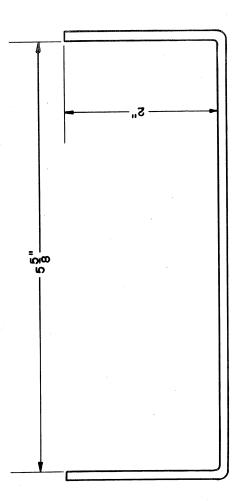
Clamp to hold second and third speed gears during assembly.
